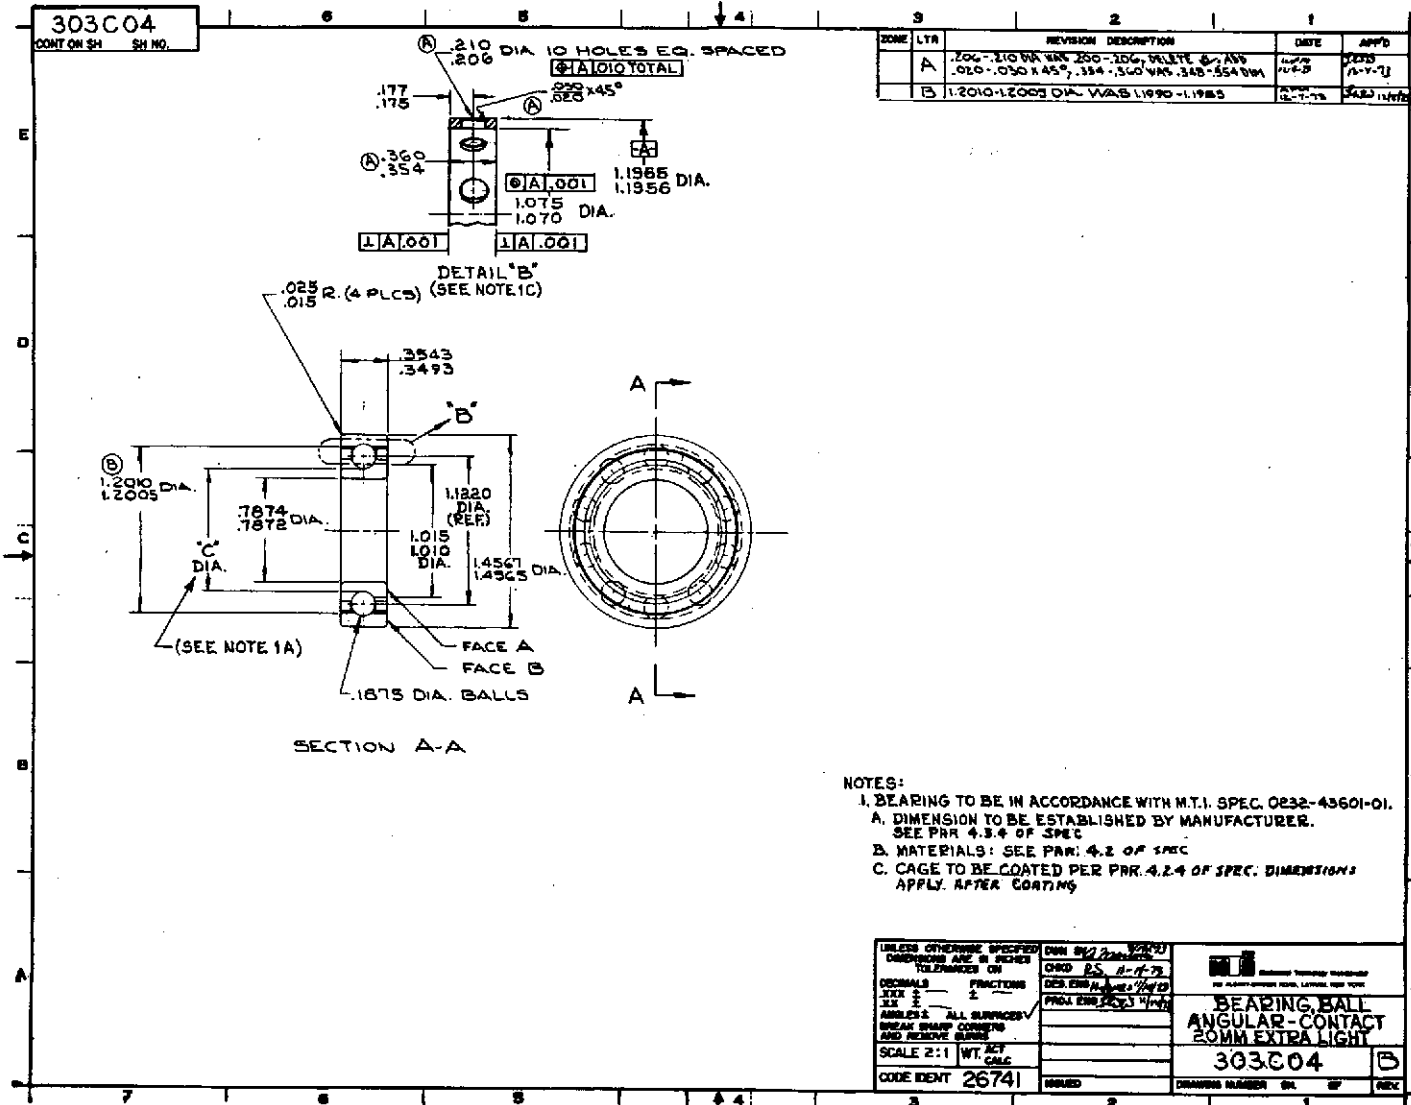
20-mm Extra-Light Series Ball Bearing Design
